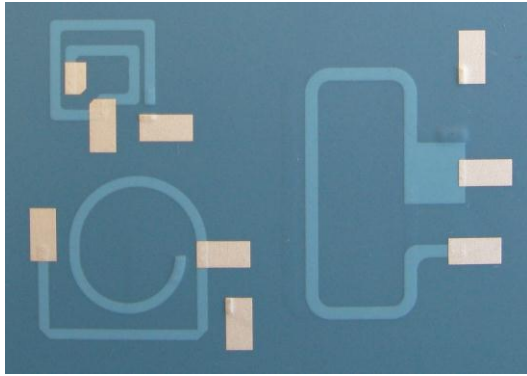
Layout demonstrators after sintering process, clockwise from lower left corner layout1, layout2, and layout3
